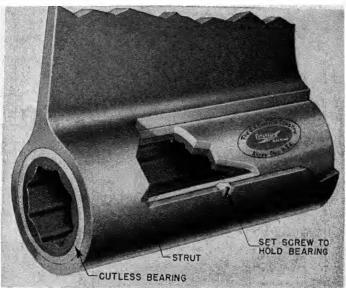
Sectional view of a standard cutless rubber bearing installed in a strut. Set screws do not extend through the rubber lining.
